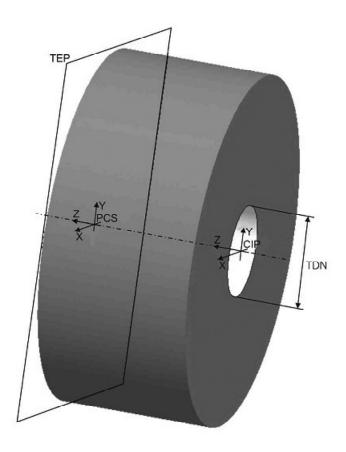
Thread-cutting die, round shape — Revolved cutting part
